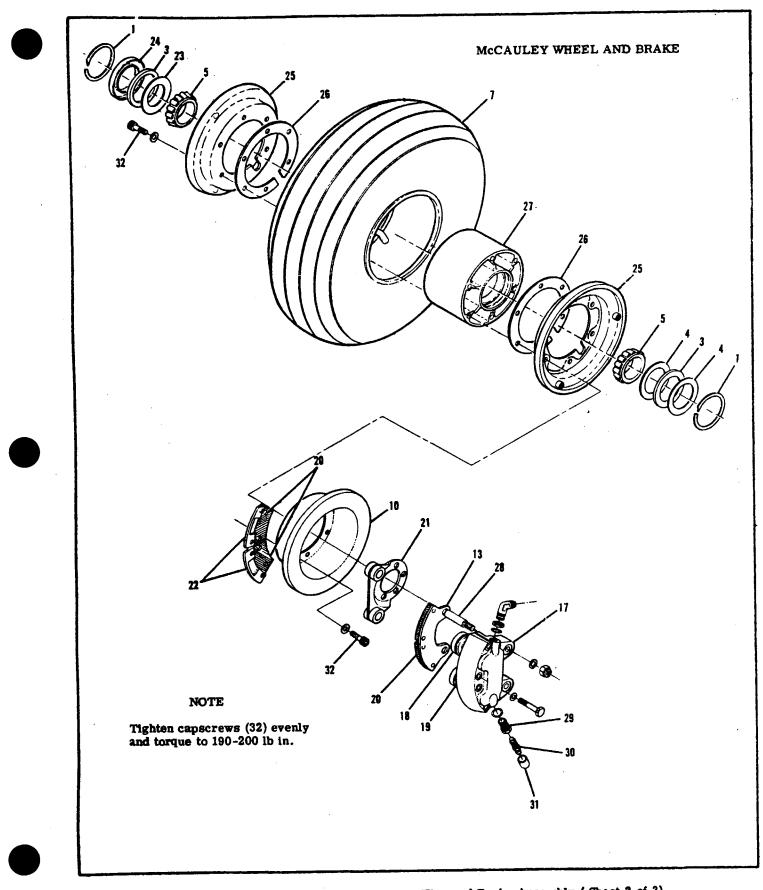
Main Landing Gear Wheel, Tire and Brake Assembly (Sheet 3 of 3)
